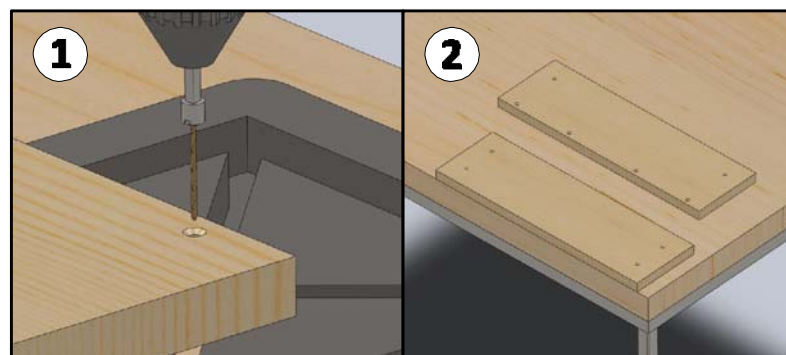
(1) Finished countersink. (2) Back piece and top with all holes drilled.
